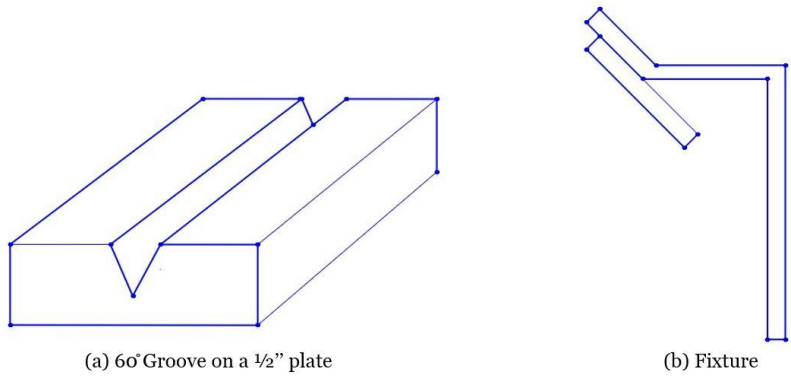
Fixture used to replicate pipeline welding.
